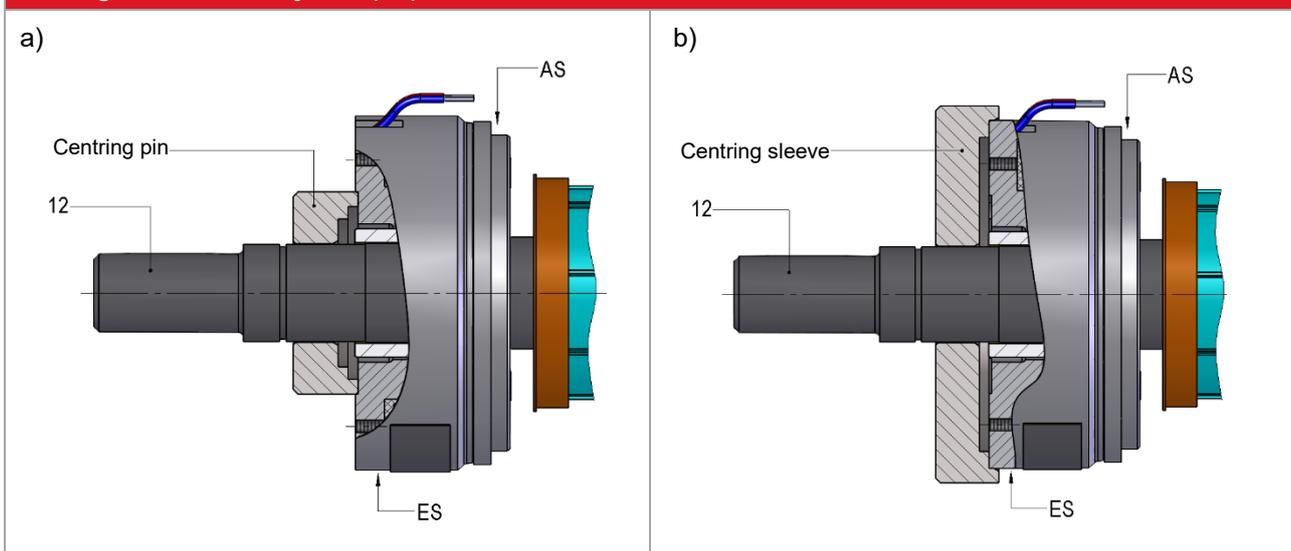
/1: High Torque brake types 86 611..P00 with armature type 800
